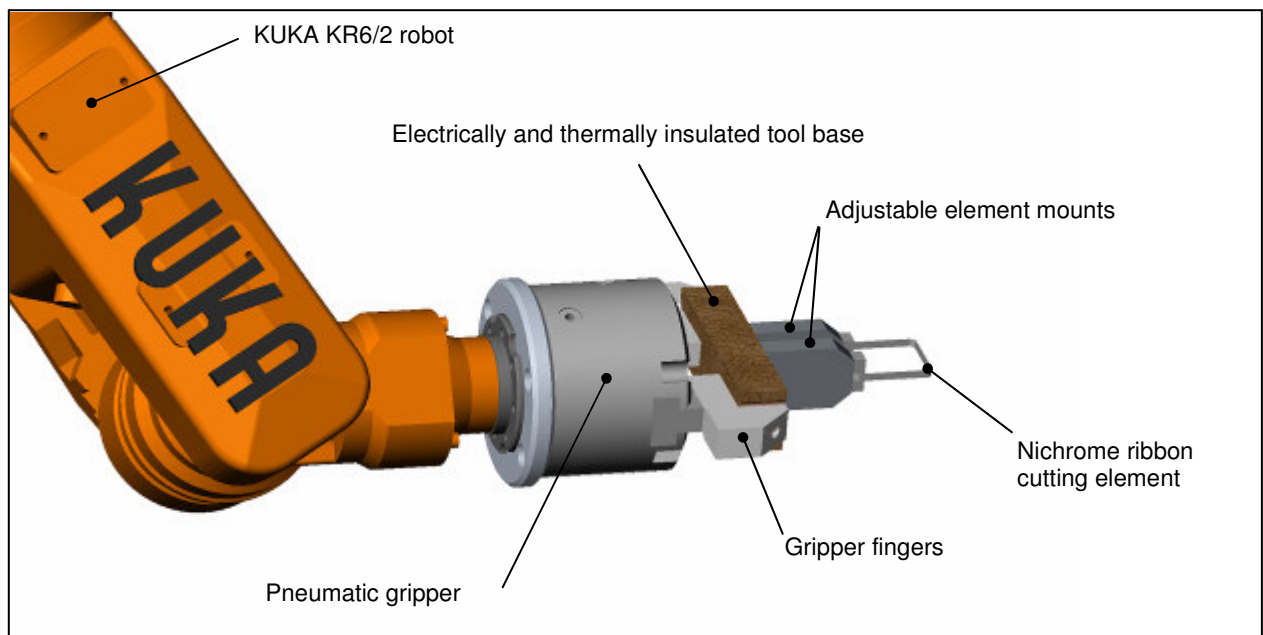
Close-up of gripper and electrically heated tool
